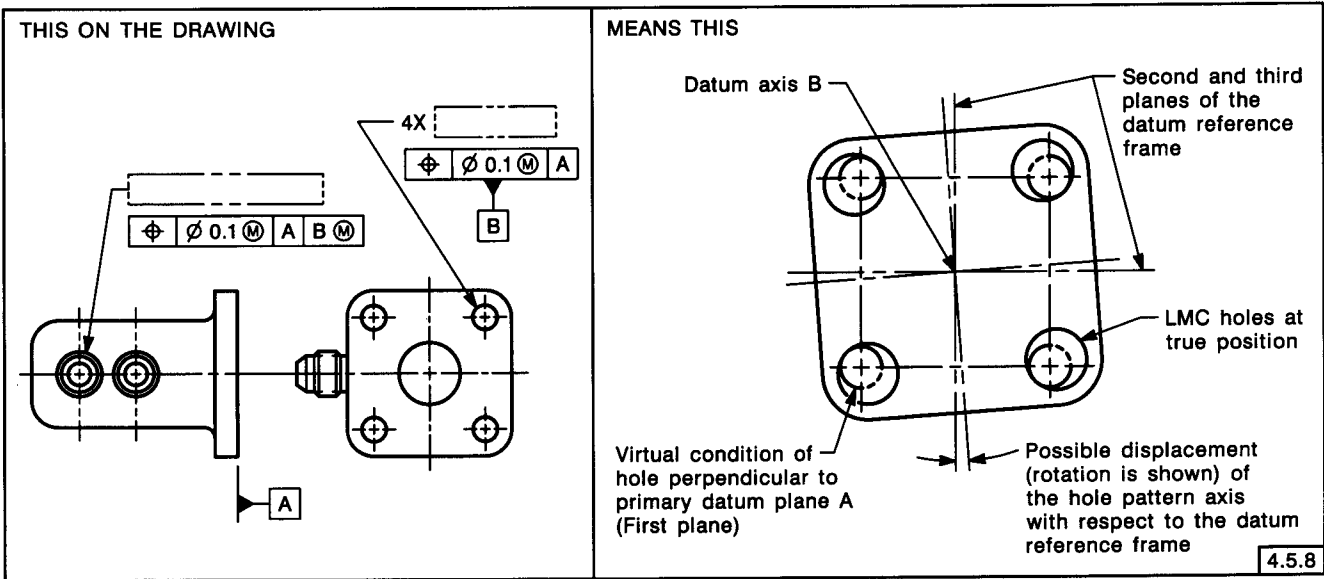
HOLE PATTERN IDENTIFIED AS DATUM
